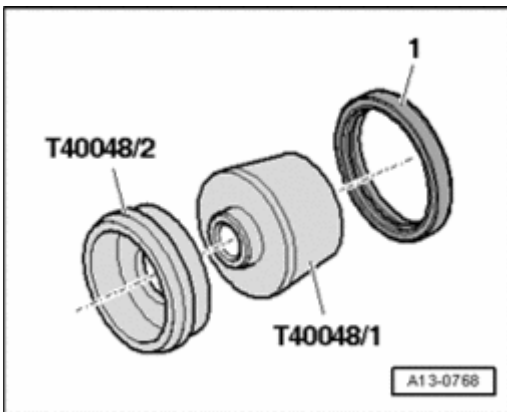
Inserting Assembly Device T40048/1 Onto Pull Sleeve T40048/2 And Sliding Seal Onto Pull Sleeve
